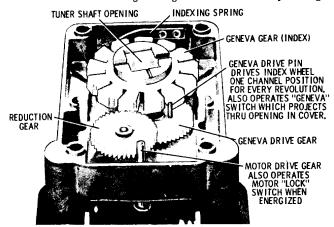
GENEVA DRIVE SYSTEM (GEAR BOX)
